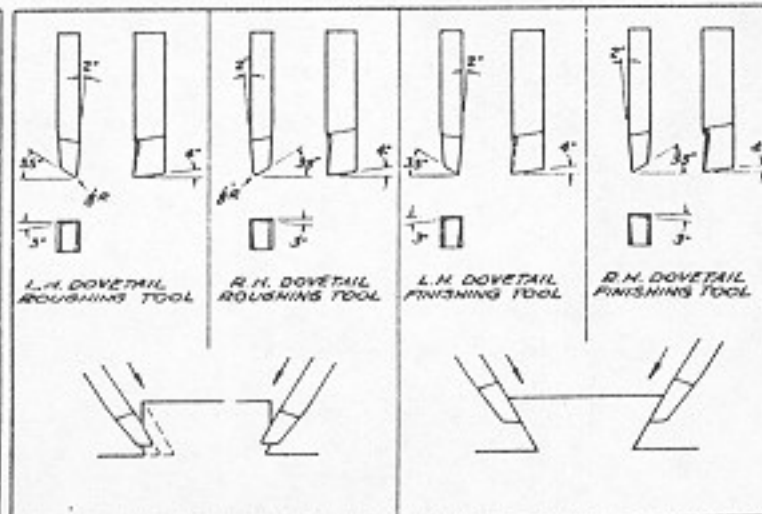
Always use a sharp tool that has been ground properly for the work being machined. The use of an oil stone on the cutting edge after grinding gives a sharper edge. (Courtesy Cincinnati Shaper Co.)
